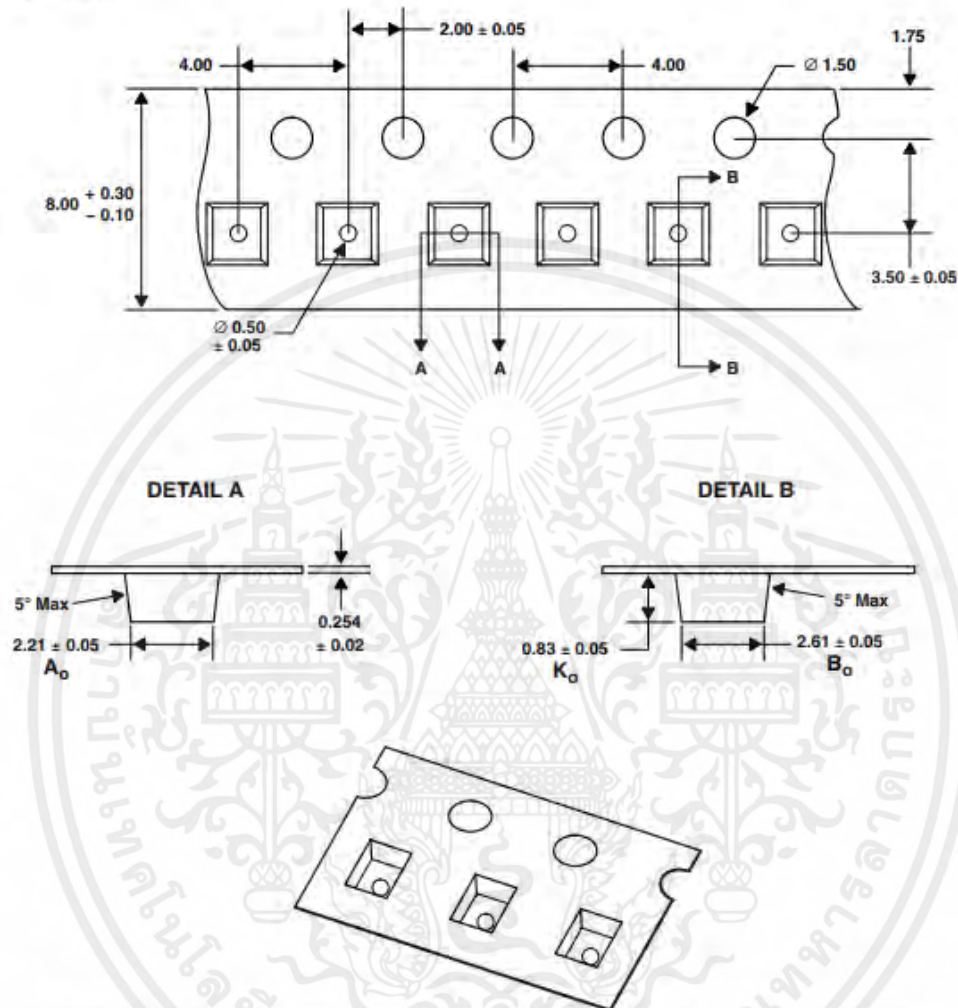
Package FN — Dual Flat No-Lead Packaging Configuration
